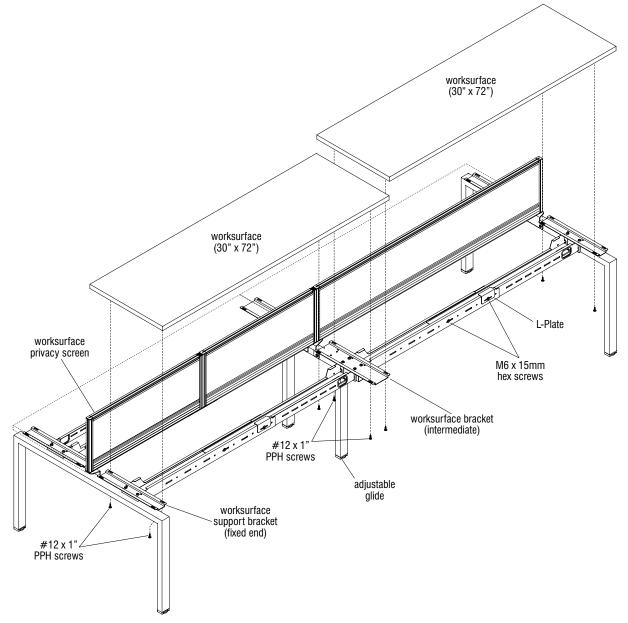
Dual-Sided Benching Worksurfaces Installation
